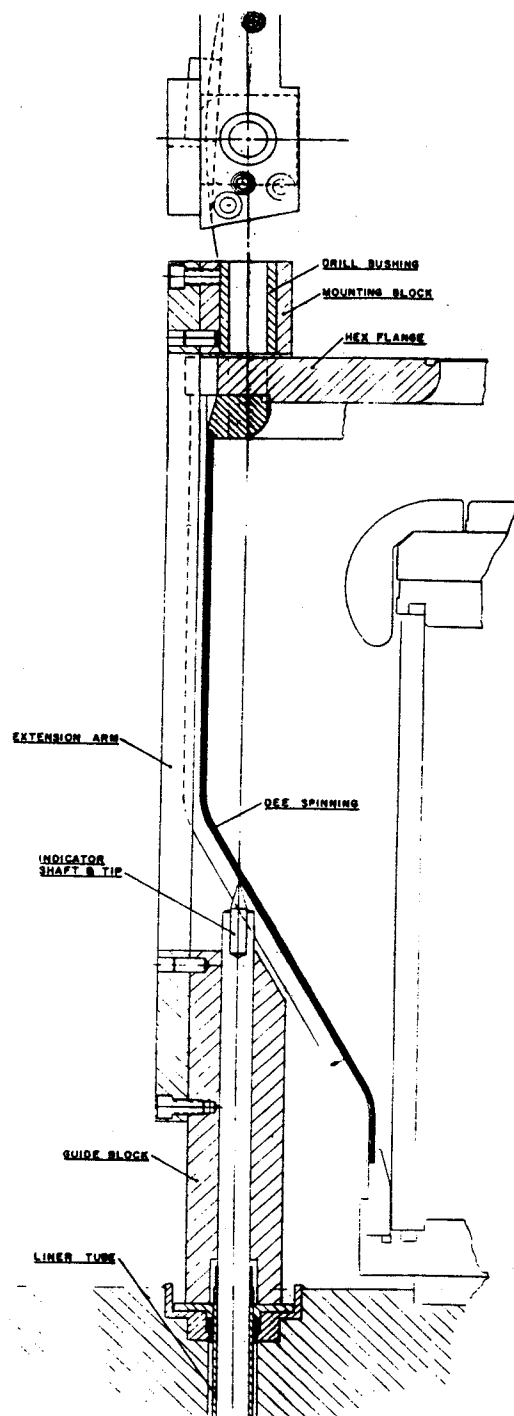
The fixture used for locating the hole in the dee stem spinning. The other end of the indicator shaft was at the median plane so it could be tapped with a hammer to mark the spinning with the sharpened point. The drill bushings provided alignment of the clearance hole and the two threaded holes for mounting the air cylinder on the hex flange.
